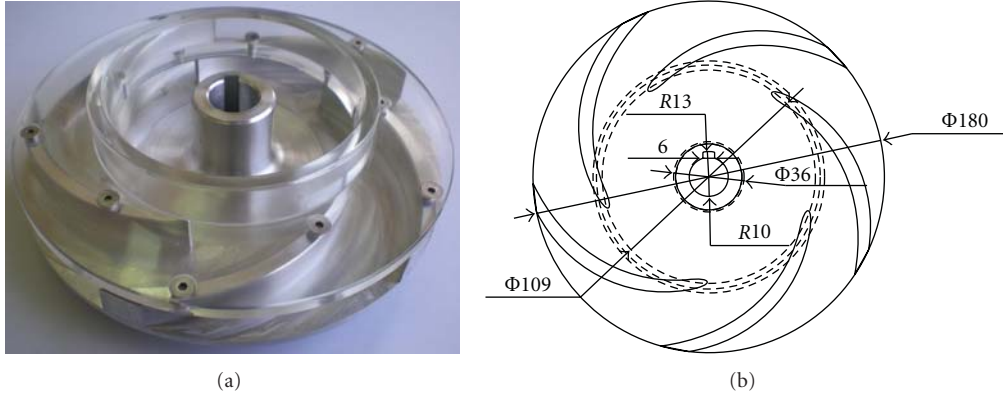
The examined impeller geometry and the scaled drawing (in mm) with blade leading edge angle of 15 deg.
